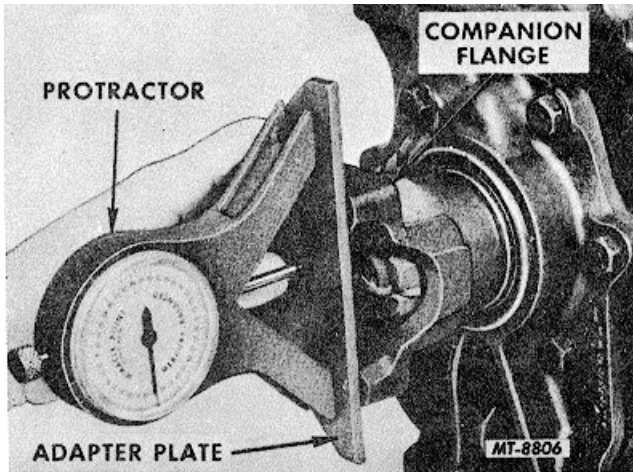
Checking Main Transmission Companion Flange Vertical Alignment
